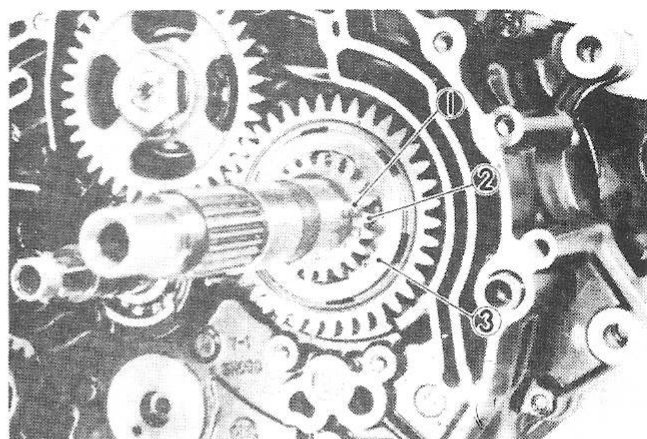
B.45 Remove the snap-ring (1), the oil pump drive gear (2) and the large washer (3) to gain access to the balancer drive gear (Sec 24)
